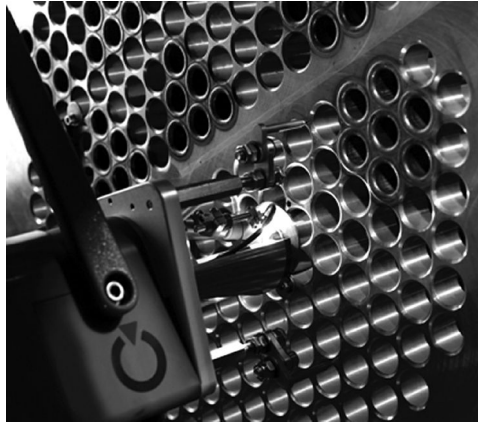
Orbital TIG welding head—welding of flush tube-to-tubesheet joint using a welding head with tube locking arrangement. (Courtesy of Polysoude S.A.S, Nantes, France.)
